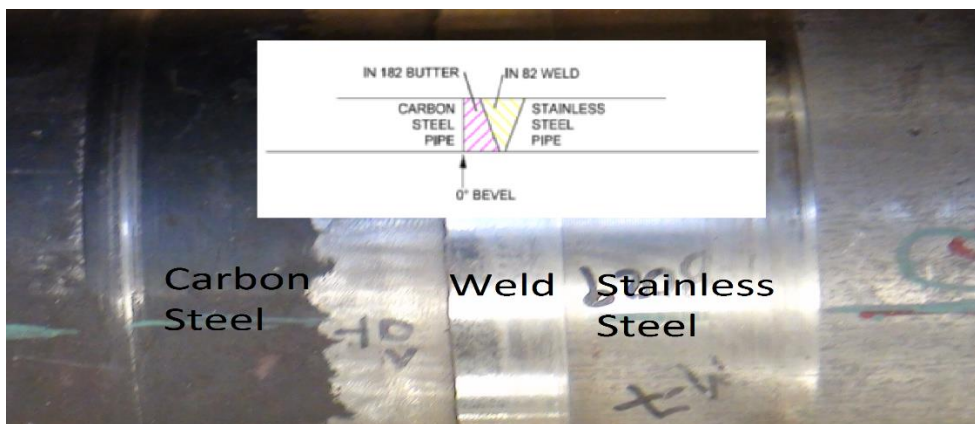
Illustrated example DM weld showing the different material regions. [5]
